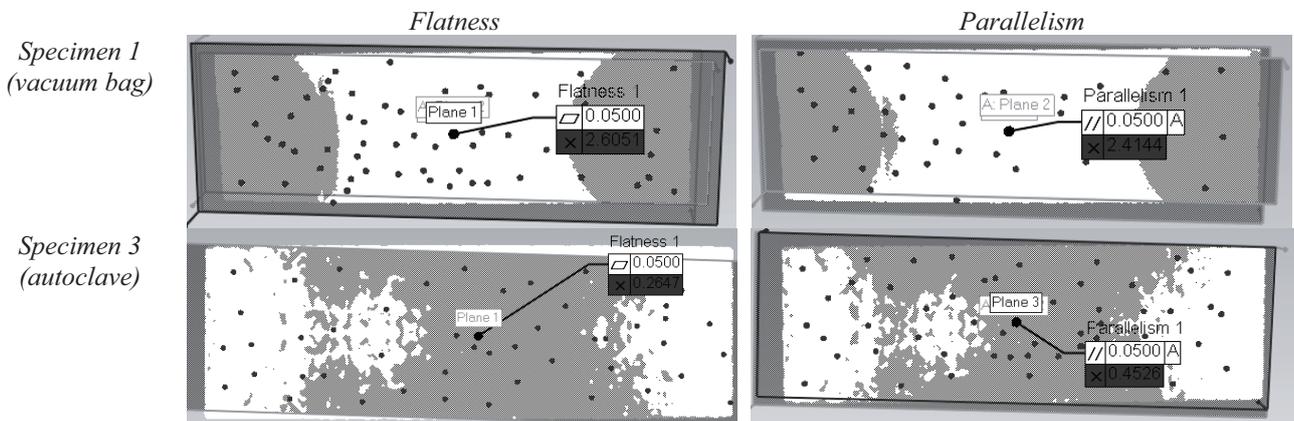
Geometric dimension and tolerancing (GD&T) – selected specimens
